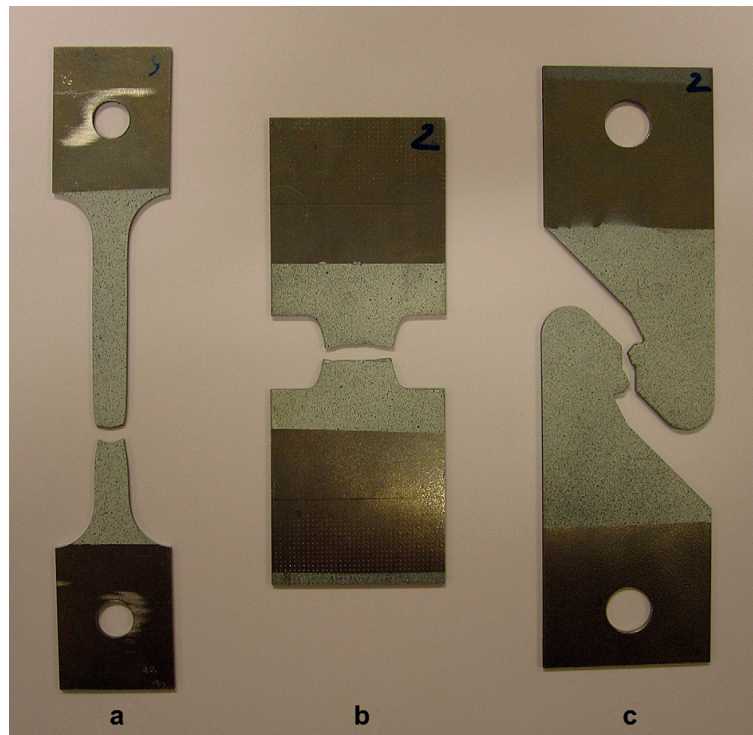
Specimens after fracture: (a) uniaxial tension specimen, (b) plane-strain tension specimen, and (c) in-plane shear specimen.
